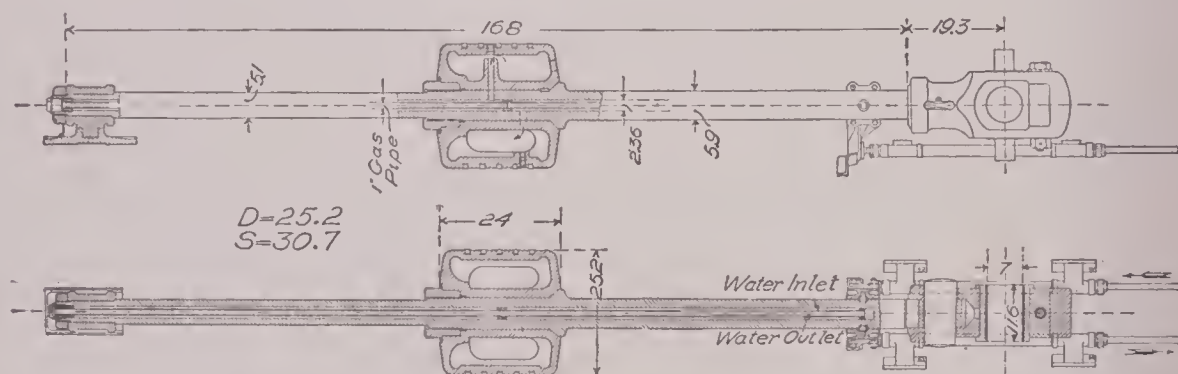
Tandem Pistons with Carrier Pistons and Cross-head, 700 H.P. Nürnberg Engine (old type).
